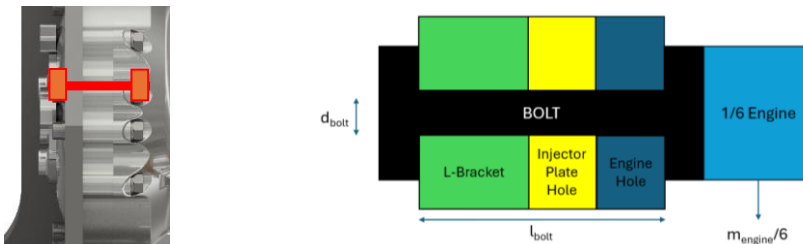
Bolt location highlighted on CAD (left). Schematic to describe assemble around bolt (right).
